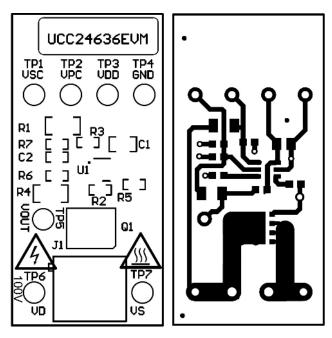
UCC24636EVM Assembly and Copper Drawings (Top View)
